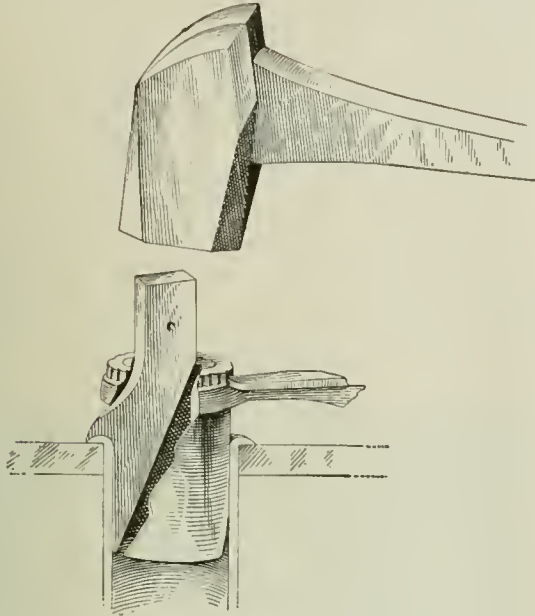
HOW THE BEADER FITS IN THE TUBE
